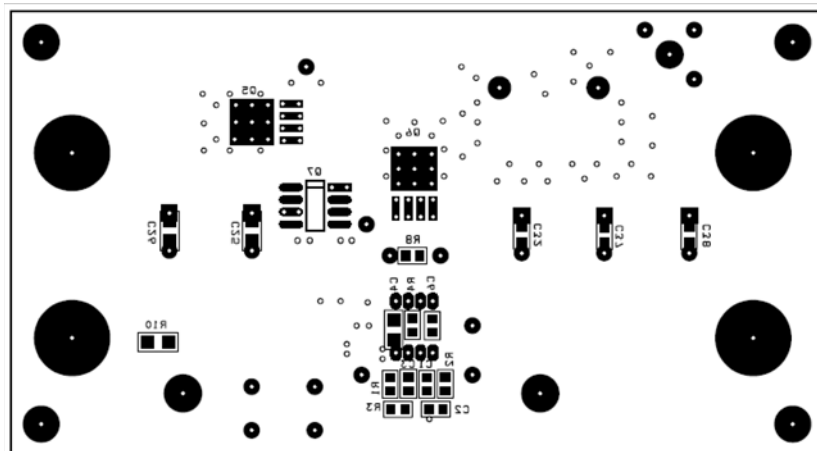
ISL8105AEVAL1Z - BOTTOM LAYER (SOLDER SIDE)
